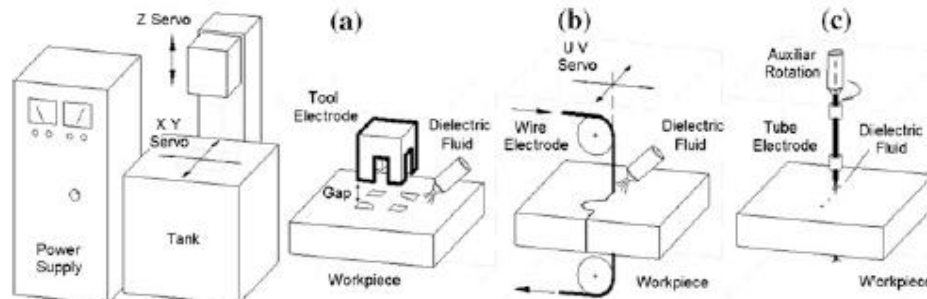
(a) sinker EDM (b) Wire EDM (c)Fast hole drilling machine
